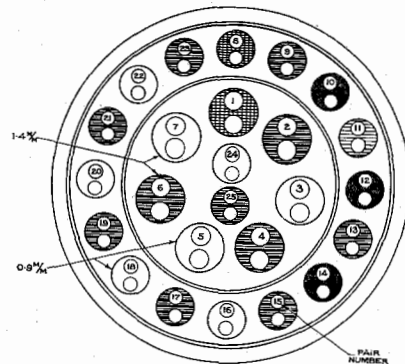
Cross Section of Cable, Stockholm-Jarna Section
